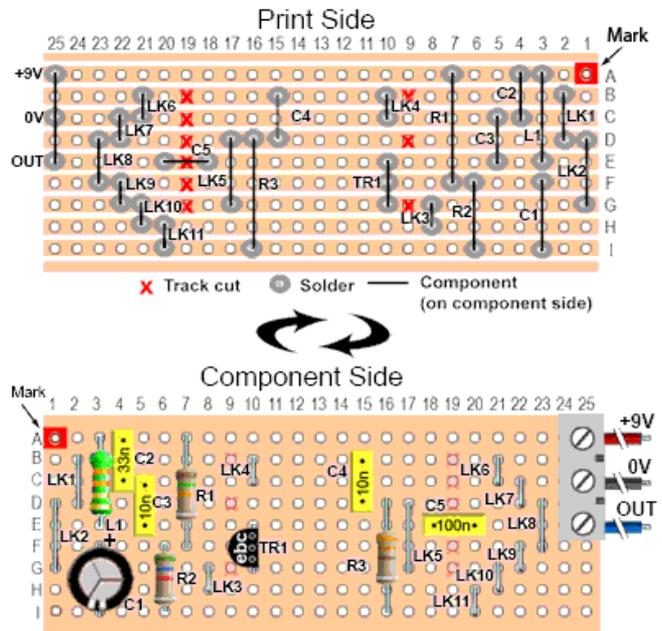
Colpitts Oscillator - Stripboard Version
